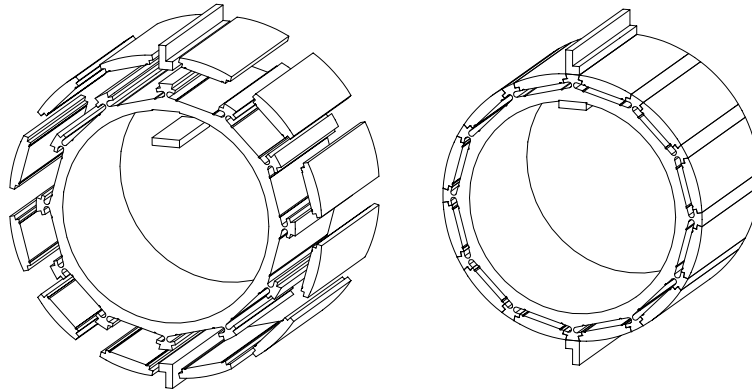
a) Exploded view showing the construction of the steel of the SST and b) assembled part.
